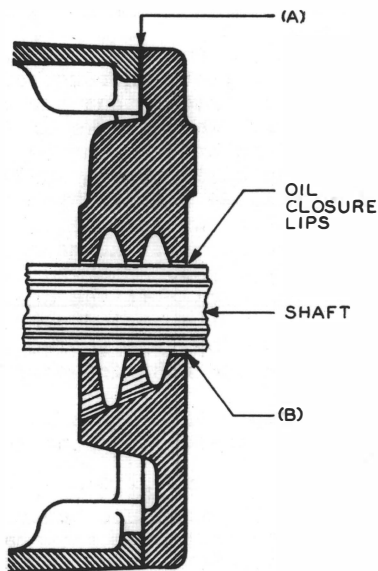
Sealed Joints and Oil Closures (No. 30A and 31A Drives)
